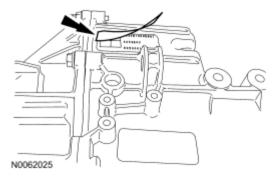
Positioning A Block Of Wood Under Transaxle Using Special Tools (014-0001) & (014-00765)
